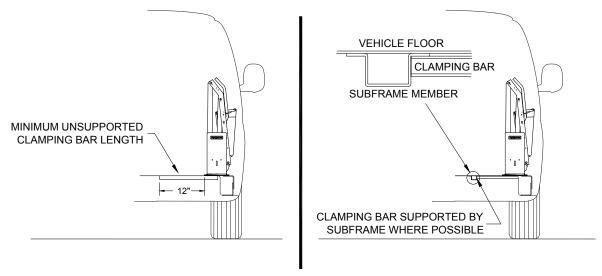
FORD VAN CLAMPING BAR ARRANGEMENT
